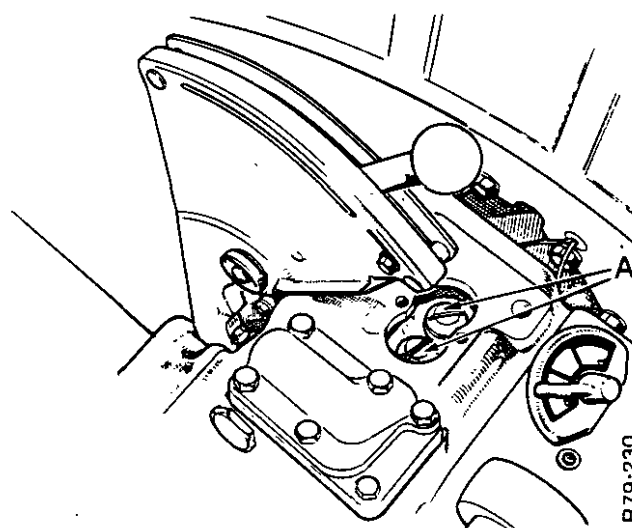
REMOVING AIR FROM THE SYSTEM AT THE HOLD AND BY-PASS VALVES
